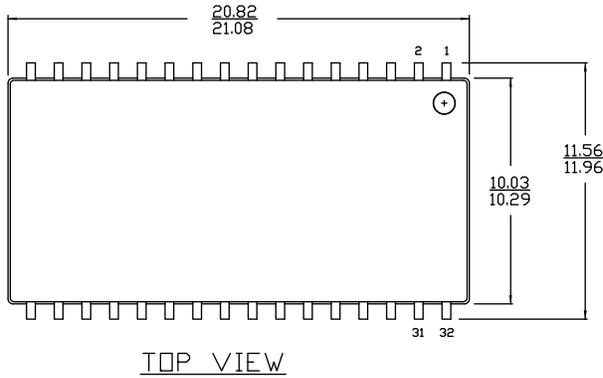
32-pin (400-Mil) Molded SOJ (51-85033)
